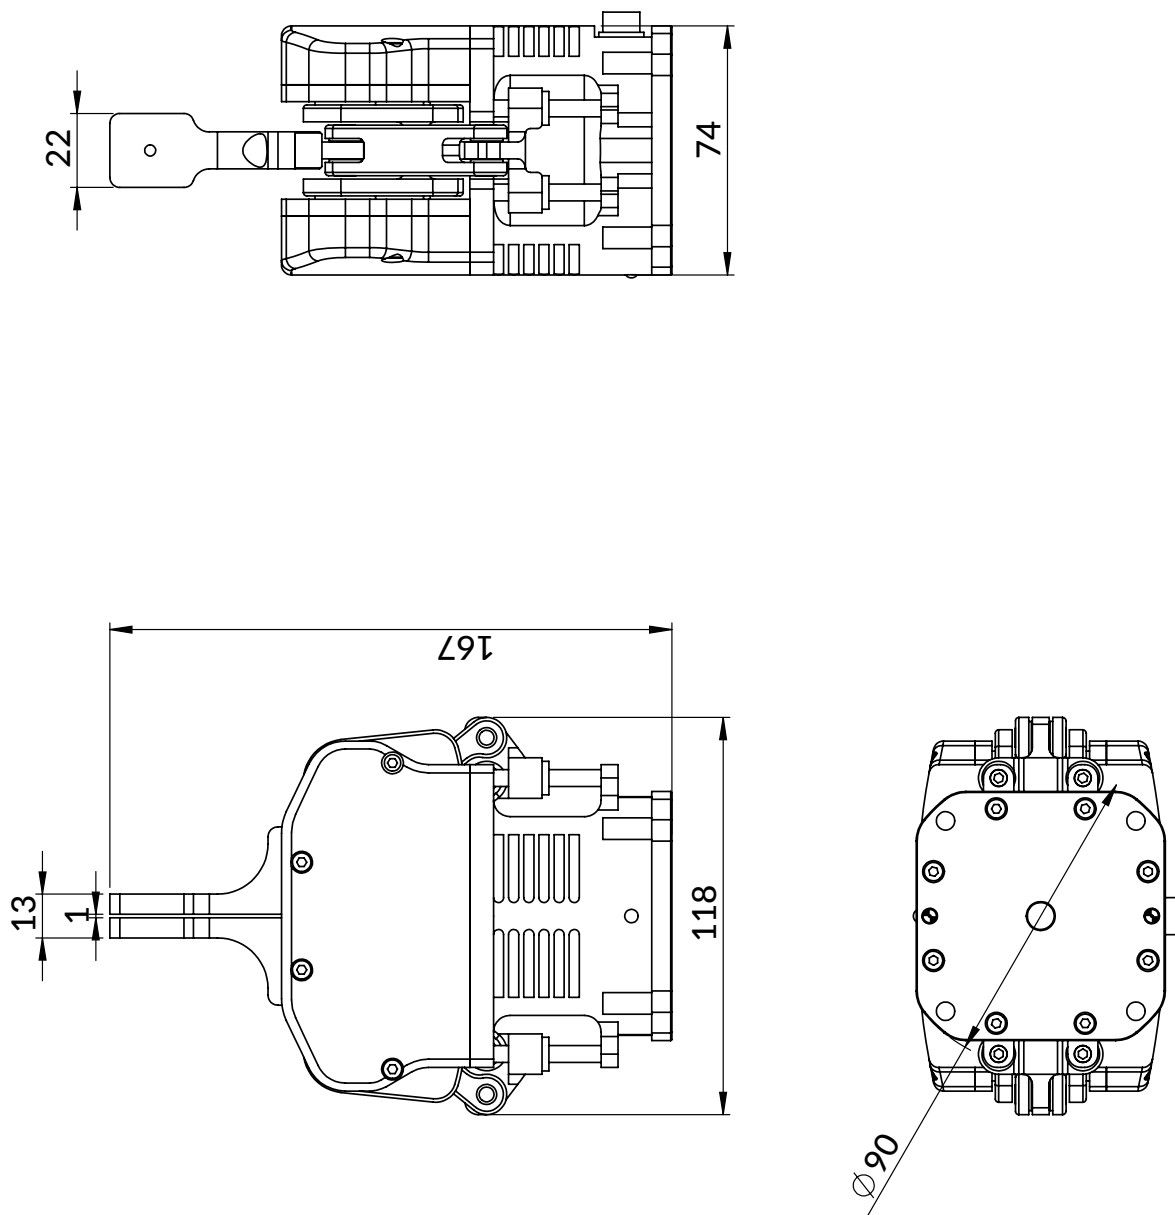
SusGrip 2F Mechanical Dimensions (Closing, Rotated)
